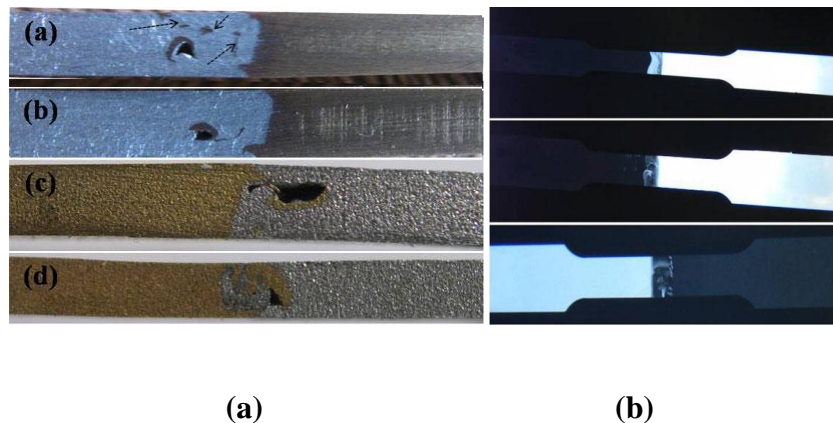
(a) Example of weld coarse brass particles and the associated tunneling defects. (b) Radiographic inspection of aluminum (light) to brass (dark) FSW joints using offsets ranging from 0 (bottom) to 1mm (top) [Esmaeili, 2012].
